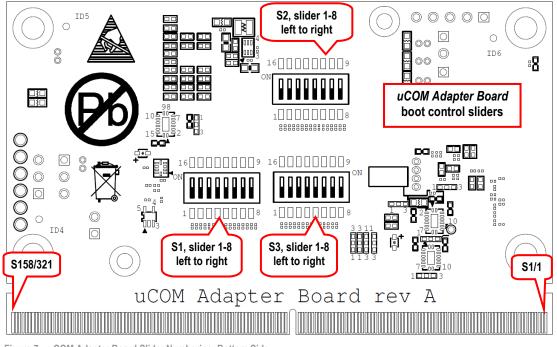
uCOM Adapter Board Slider Numbering, Bottom Side
